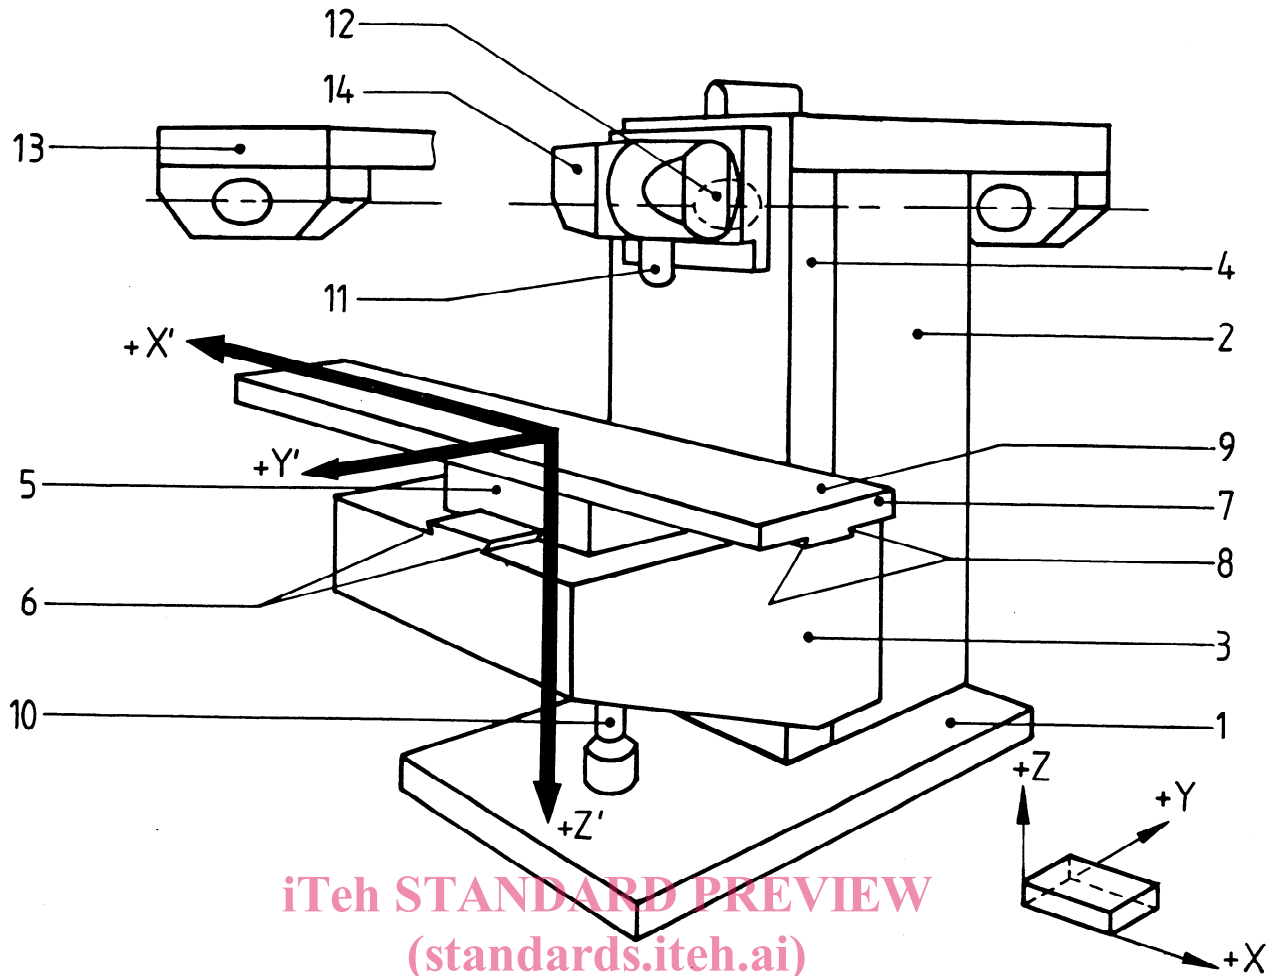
Milling machine with table of variable height, with a movable head, with horizontal or vertical spindle
